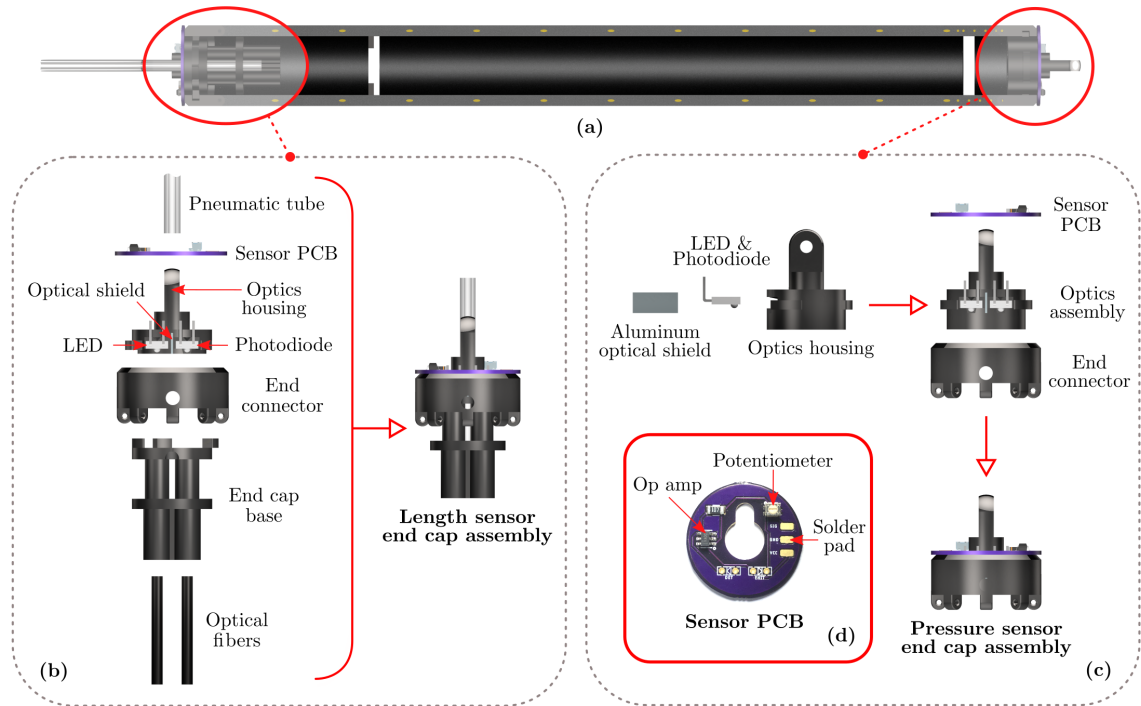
Optical length and pressure sensor assemblies for integration with pneumatic artificial muscle: (a) cross-section of muscle showing locations of sensor assemblies; (b) length sensor end cap assembly; (c) pressure sensor end cap assembly; (d) sensor circuit board.
